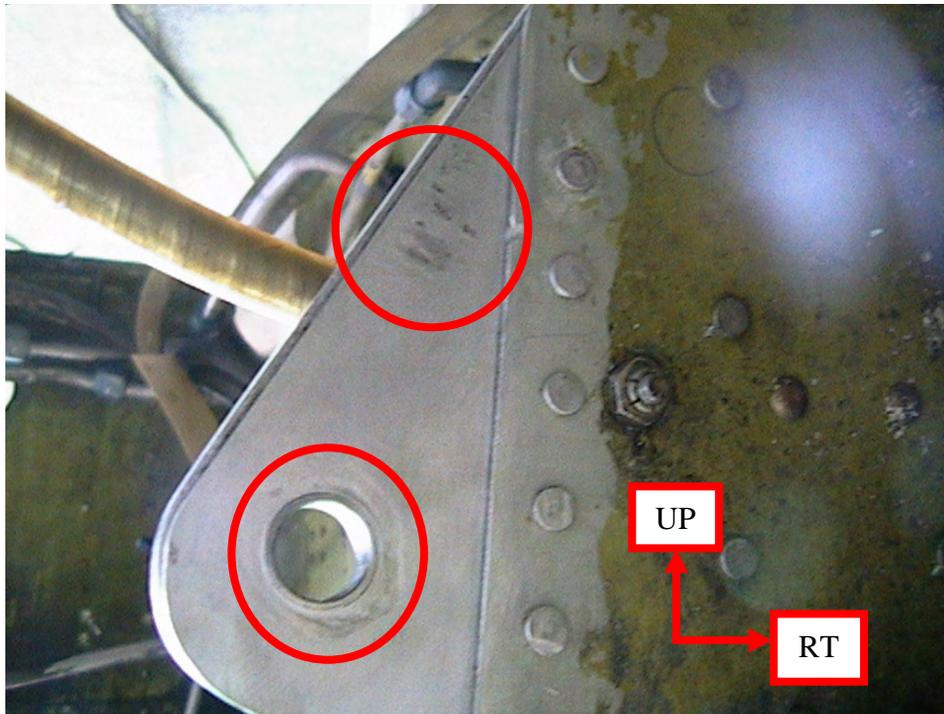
Corrosion on the Right Wing Rear Spar Wing Side Attachment Point WS 30
